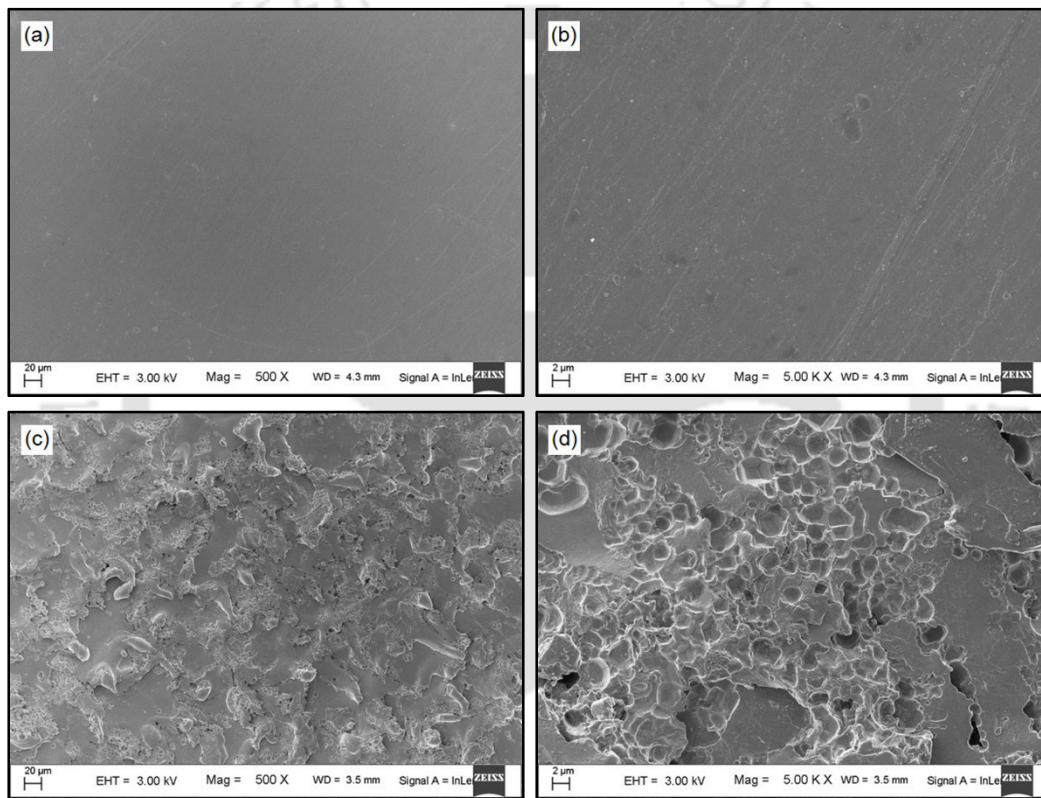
Scanning electron micrographs of gear tooth surface manufactured by (a–b) conventional machining and (c–d) wire-cut electric discharge machining
